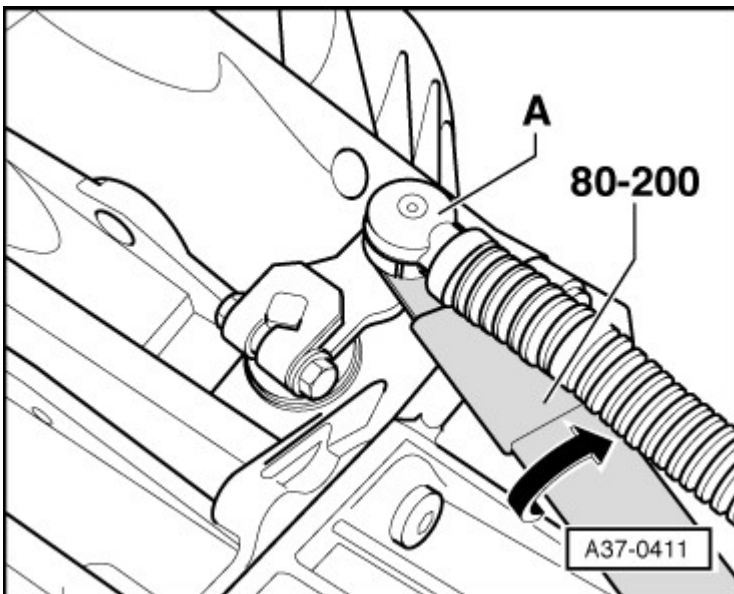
Using Pry Lever 80-200 To Press Selector Lever Cable From Lever For Selector Shaft
